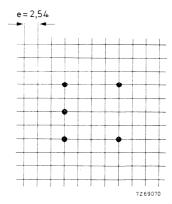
Hole pattern for mounting on a printed-wiring board, hole dia 1, 3+0, 1 mm
